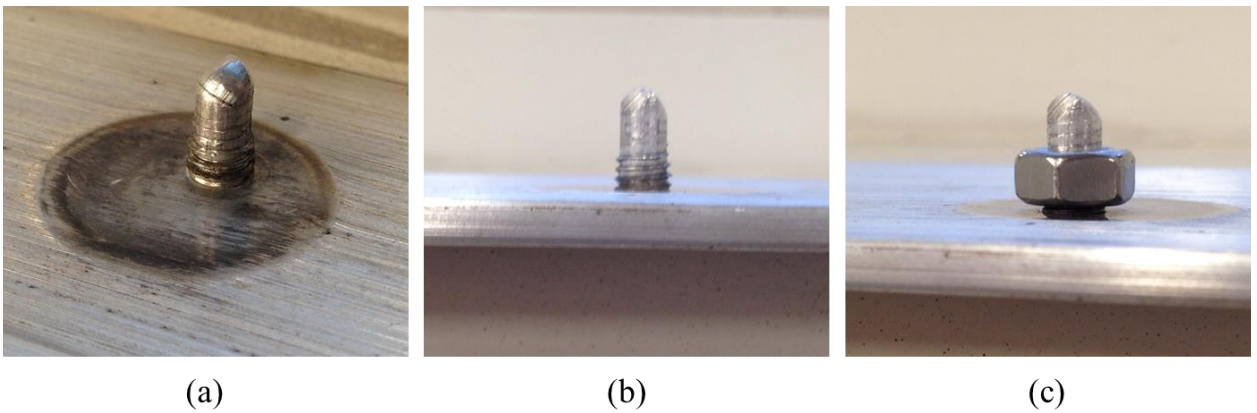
Aluminum plastically deformed into the threaded hole. a) top view of extruded weld zone material b) side view of threads c) side view with a standard nut attached to the threads.
